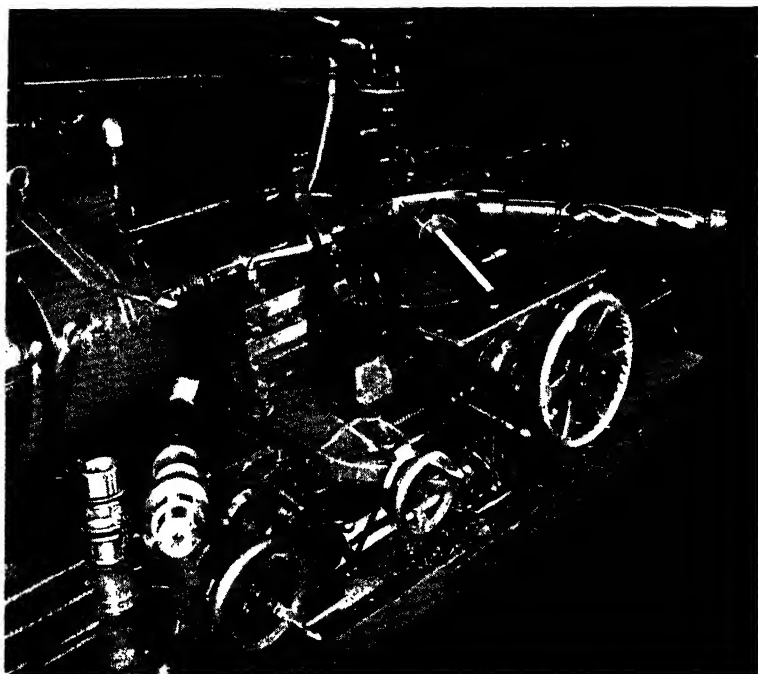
Machining Landing Gear Cylinders in Turret Lathe
